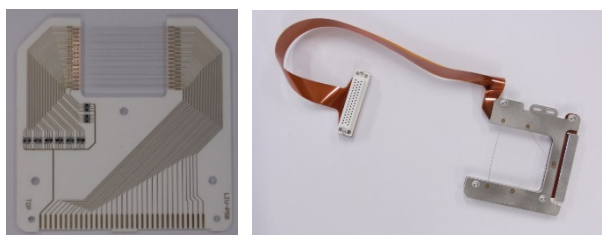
CERN standard SEM-Grid: Left: Alumina PCB with wires and resistors; right: assembly with Flex-PCB.
